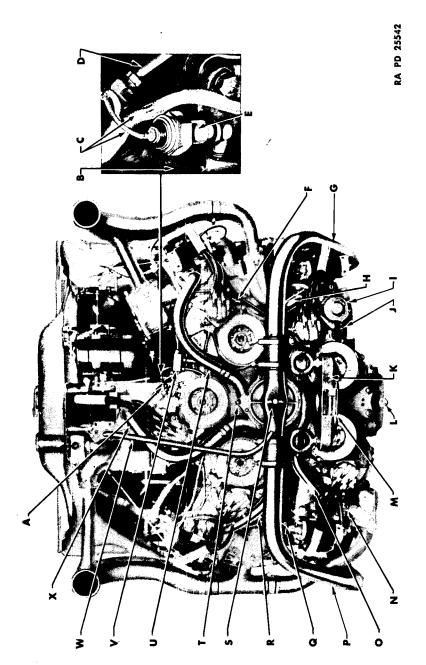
M4A4 Power Unit, Distributor End (Single Water Pump Type)
